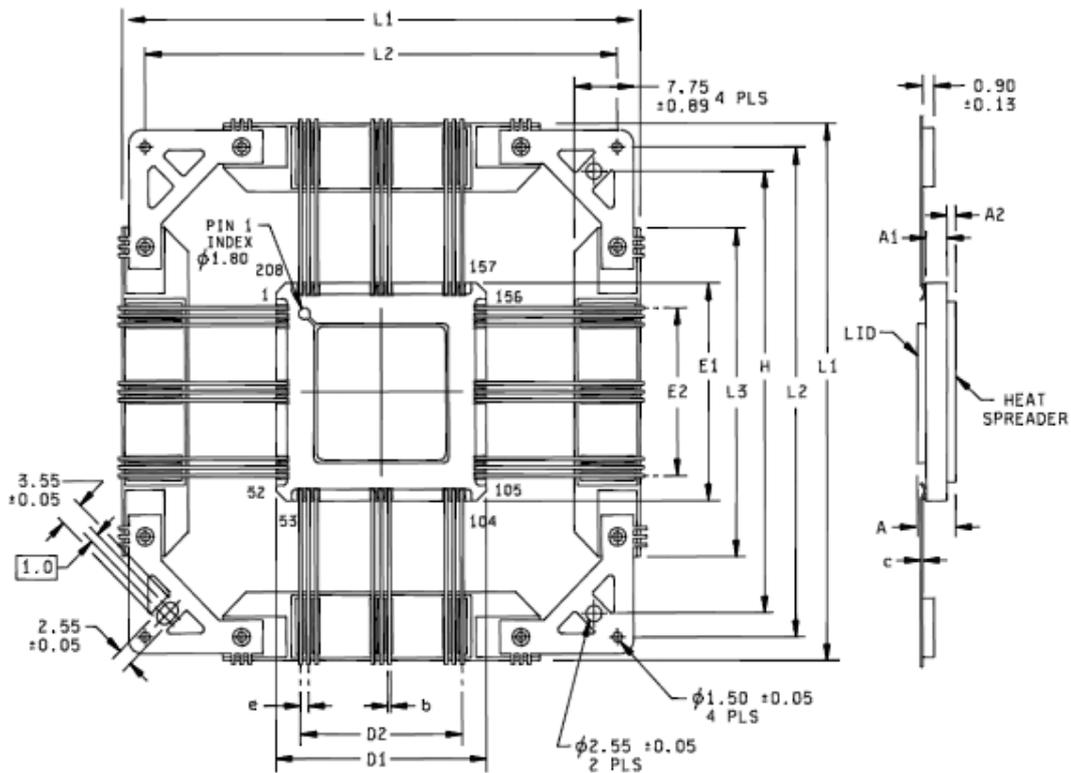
PACKAGE MECHANICAL DRAWING
